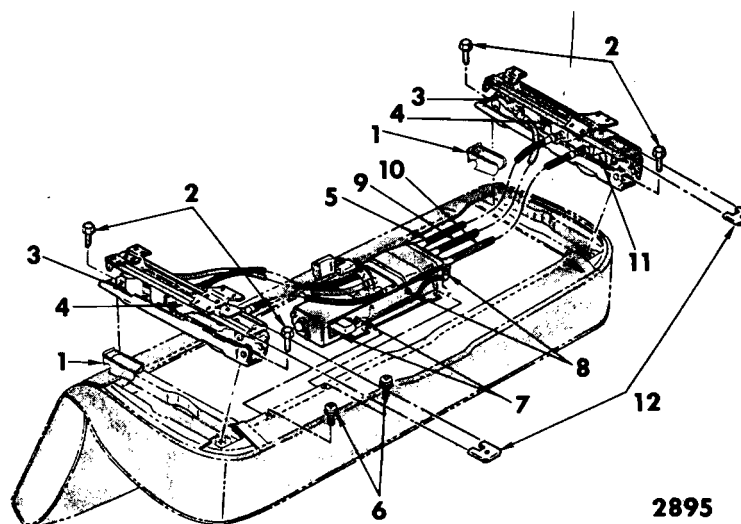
Front Seat Assembly-Six-Way - "B & C" Full Width Seat
